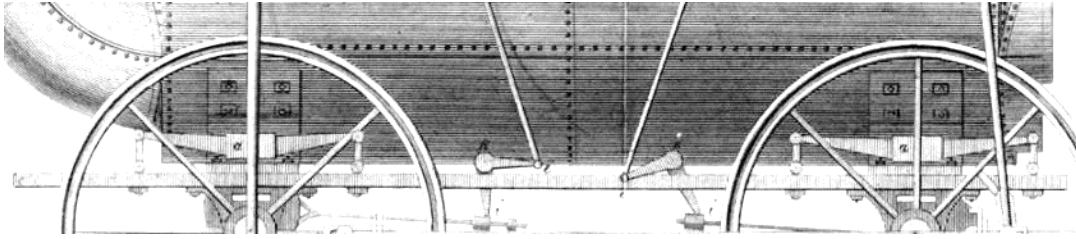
Boiler support brackets behind springs, with flanges bolted to frame beneath springs on Killingworth locomotive. [Fig. 9.4 – detail]
